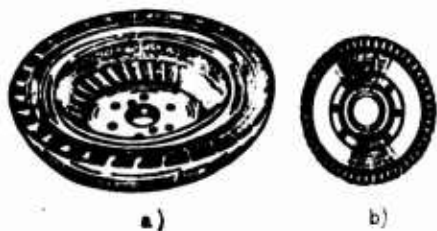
Assemblies prepared with the help of soldering in furnace: a) entrance apparatus of compressor soldered from 80 components; b) rotor of turbine.
